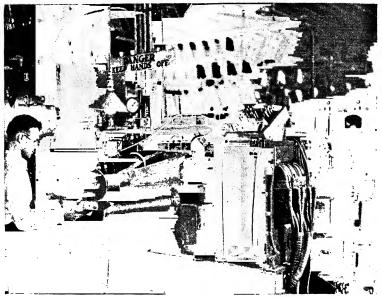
57.—Seam welder in operation. (Douglas Aircraft, Inc.)
